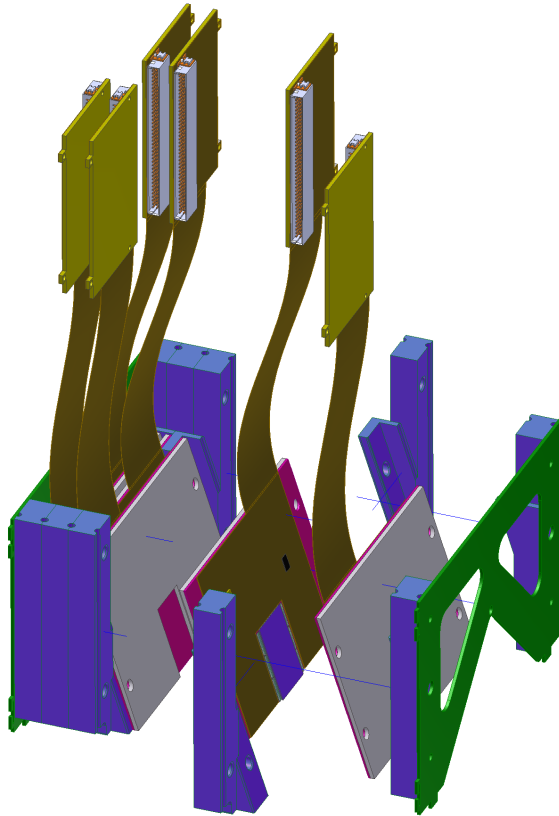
Exploded view of one detector package. Pairs of modules are screwed face to face to two aluminium support bars which are in tight contact with the cooling pipes (see text for full explanation).
